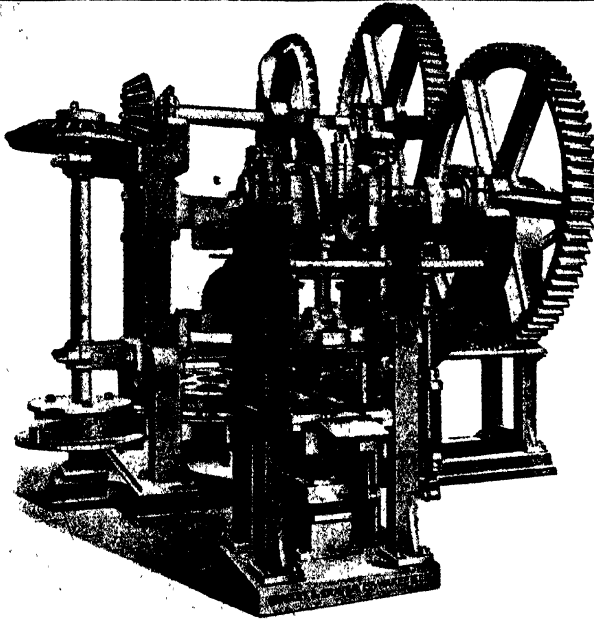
Stiff-plastic brick machine with clot-moulds on rotary table.
